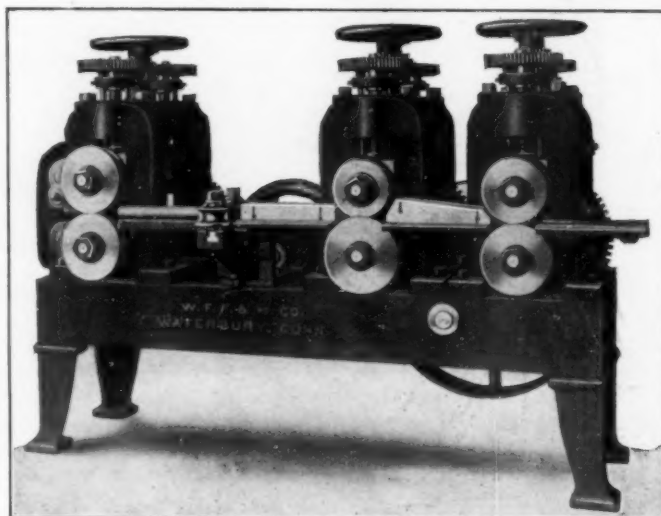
LARGE SIZE MACHINE FOR FORMING UP METAL FOR MAKING BRAZED TUBING.
